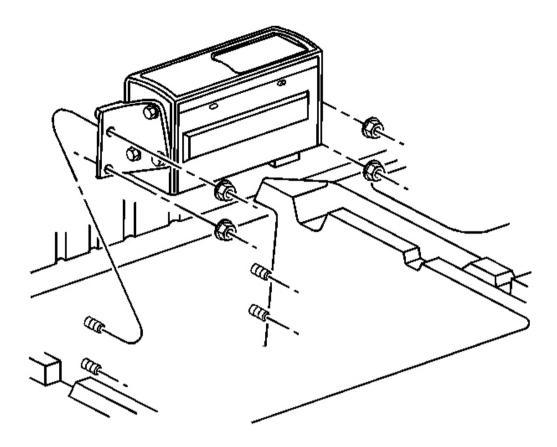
Remote CD Changer & Mounting Nuts Courtesy of GENERAL MOTORS CORP.
